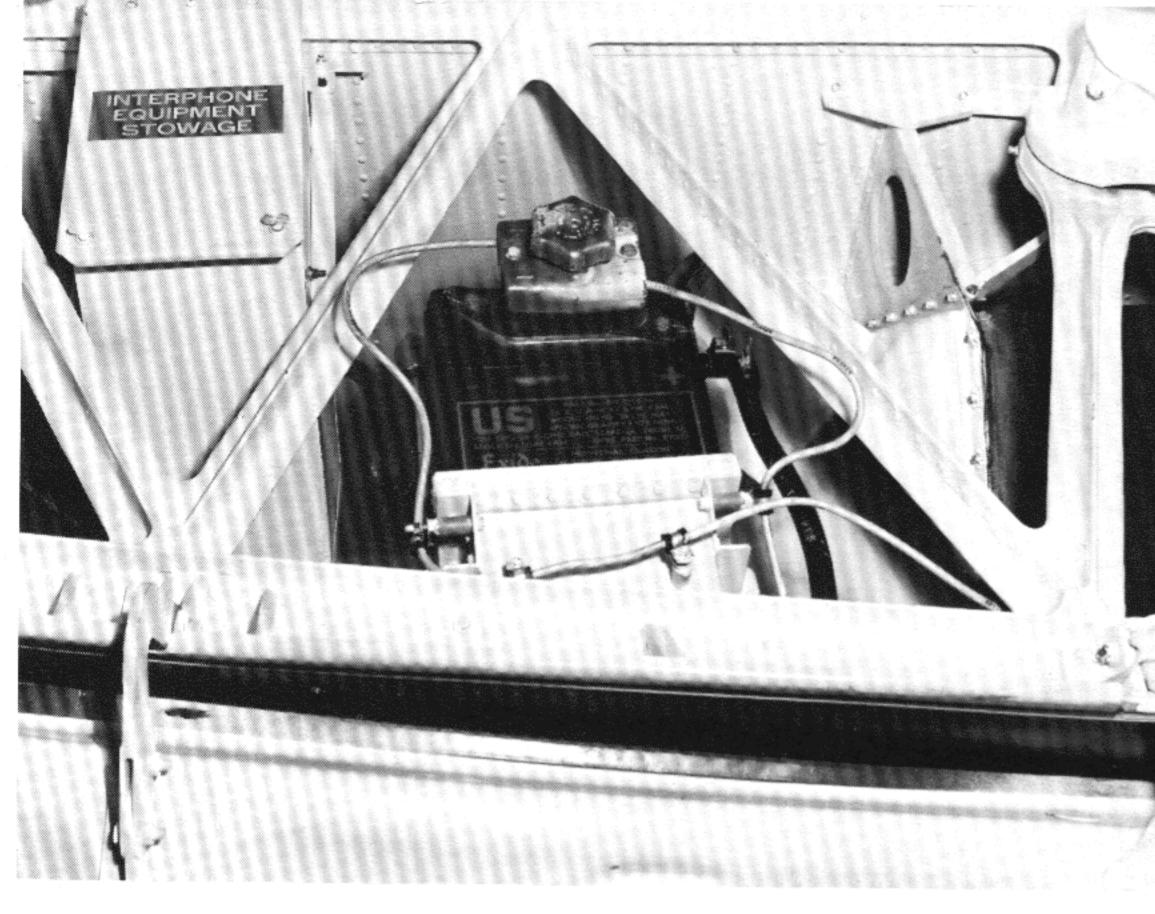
Battery Installation in Nose Gear Wheel Well — Cover Removed
